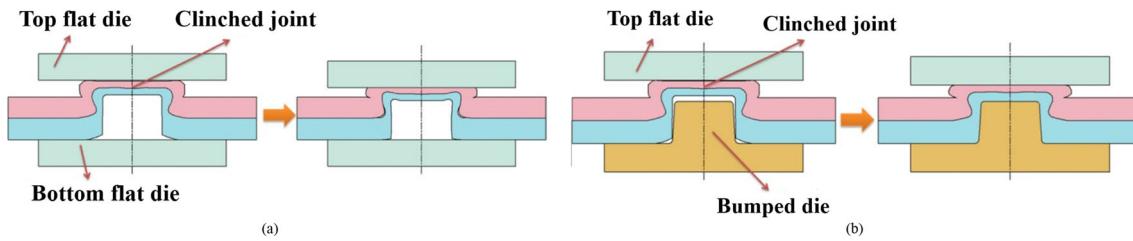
Forming process of (a) reshaped clinching with a flat die and (b) reshaped clinching with a bumped die [35]
